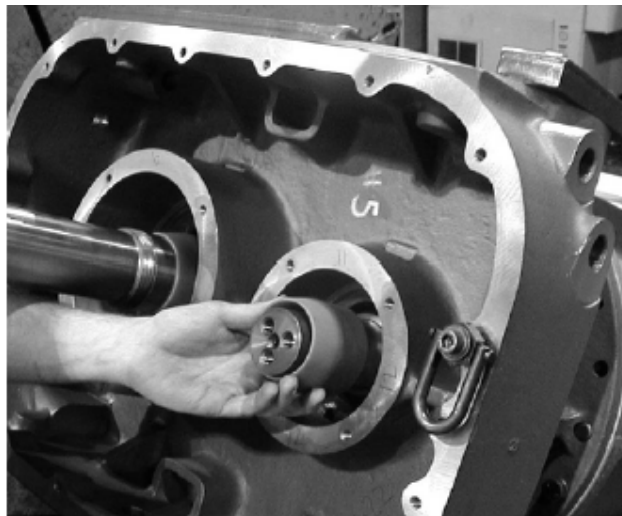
SEAL INSTALLATION GUIDE
